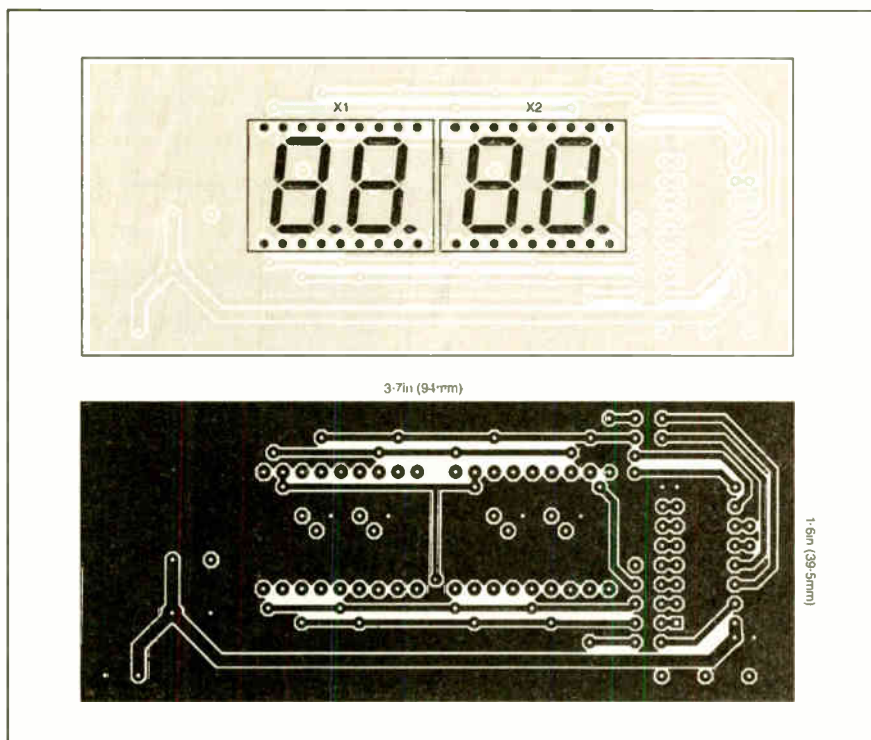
Dual 7-segment display mounted on the Display board and full-size topside copper foil master pattern.
